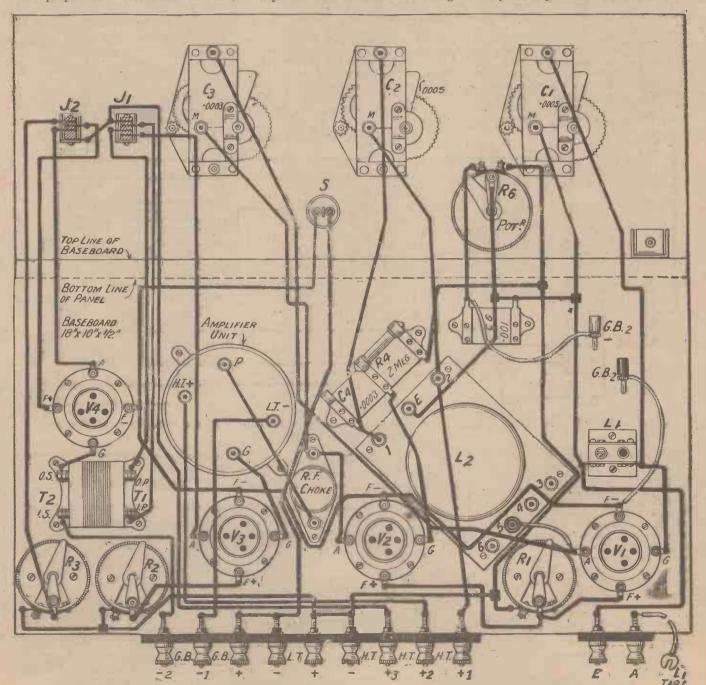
The disposition of the coils upon the baseboard should be carefully copied from this wiring diagram.
